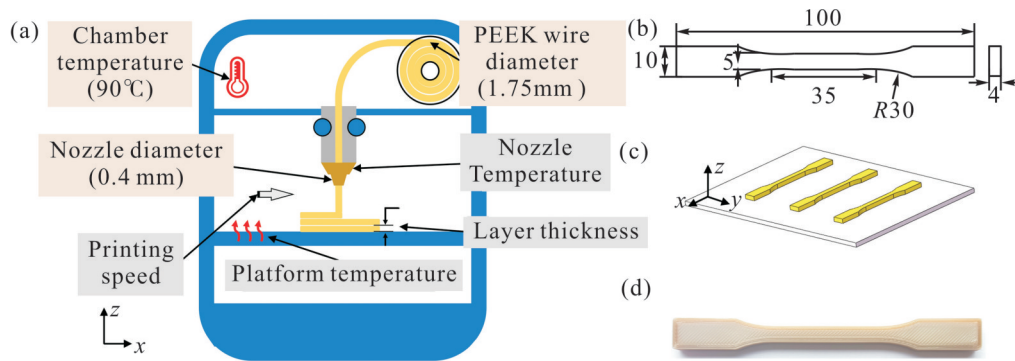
FDM printing of PEEK samples: (a) schematic of FDM printed PEEK sample; (b) design dimensions of PEEK sample; (c) printing direction and quantity; (d) FDM printed PEEK sample
